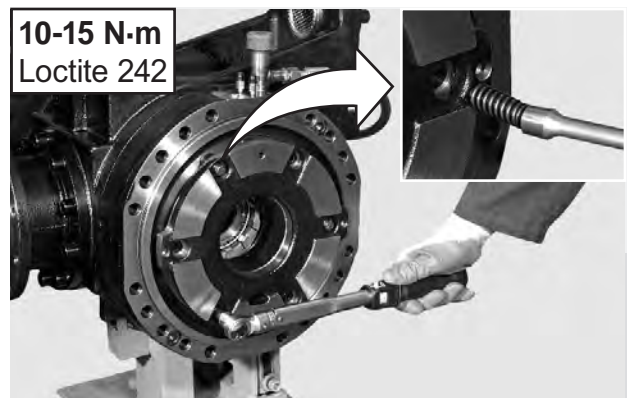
Fit the reversal springs (9) and screws (10) on the intermediate disk (16). Apply LOCTITE 242 to the thread of the fixing screw. Tighten with torque wrench setting of 10 - 15 N·m
